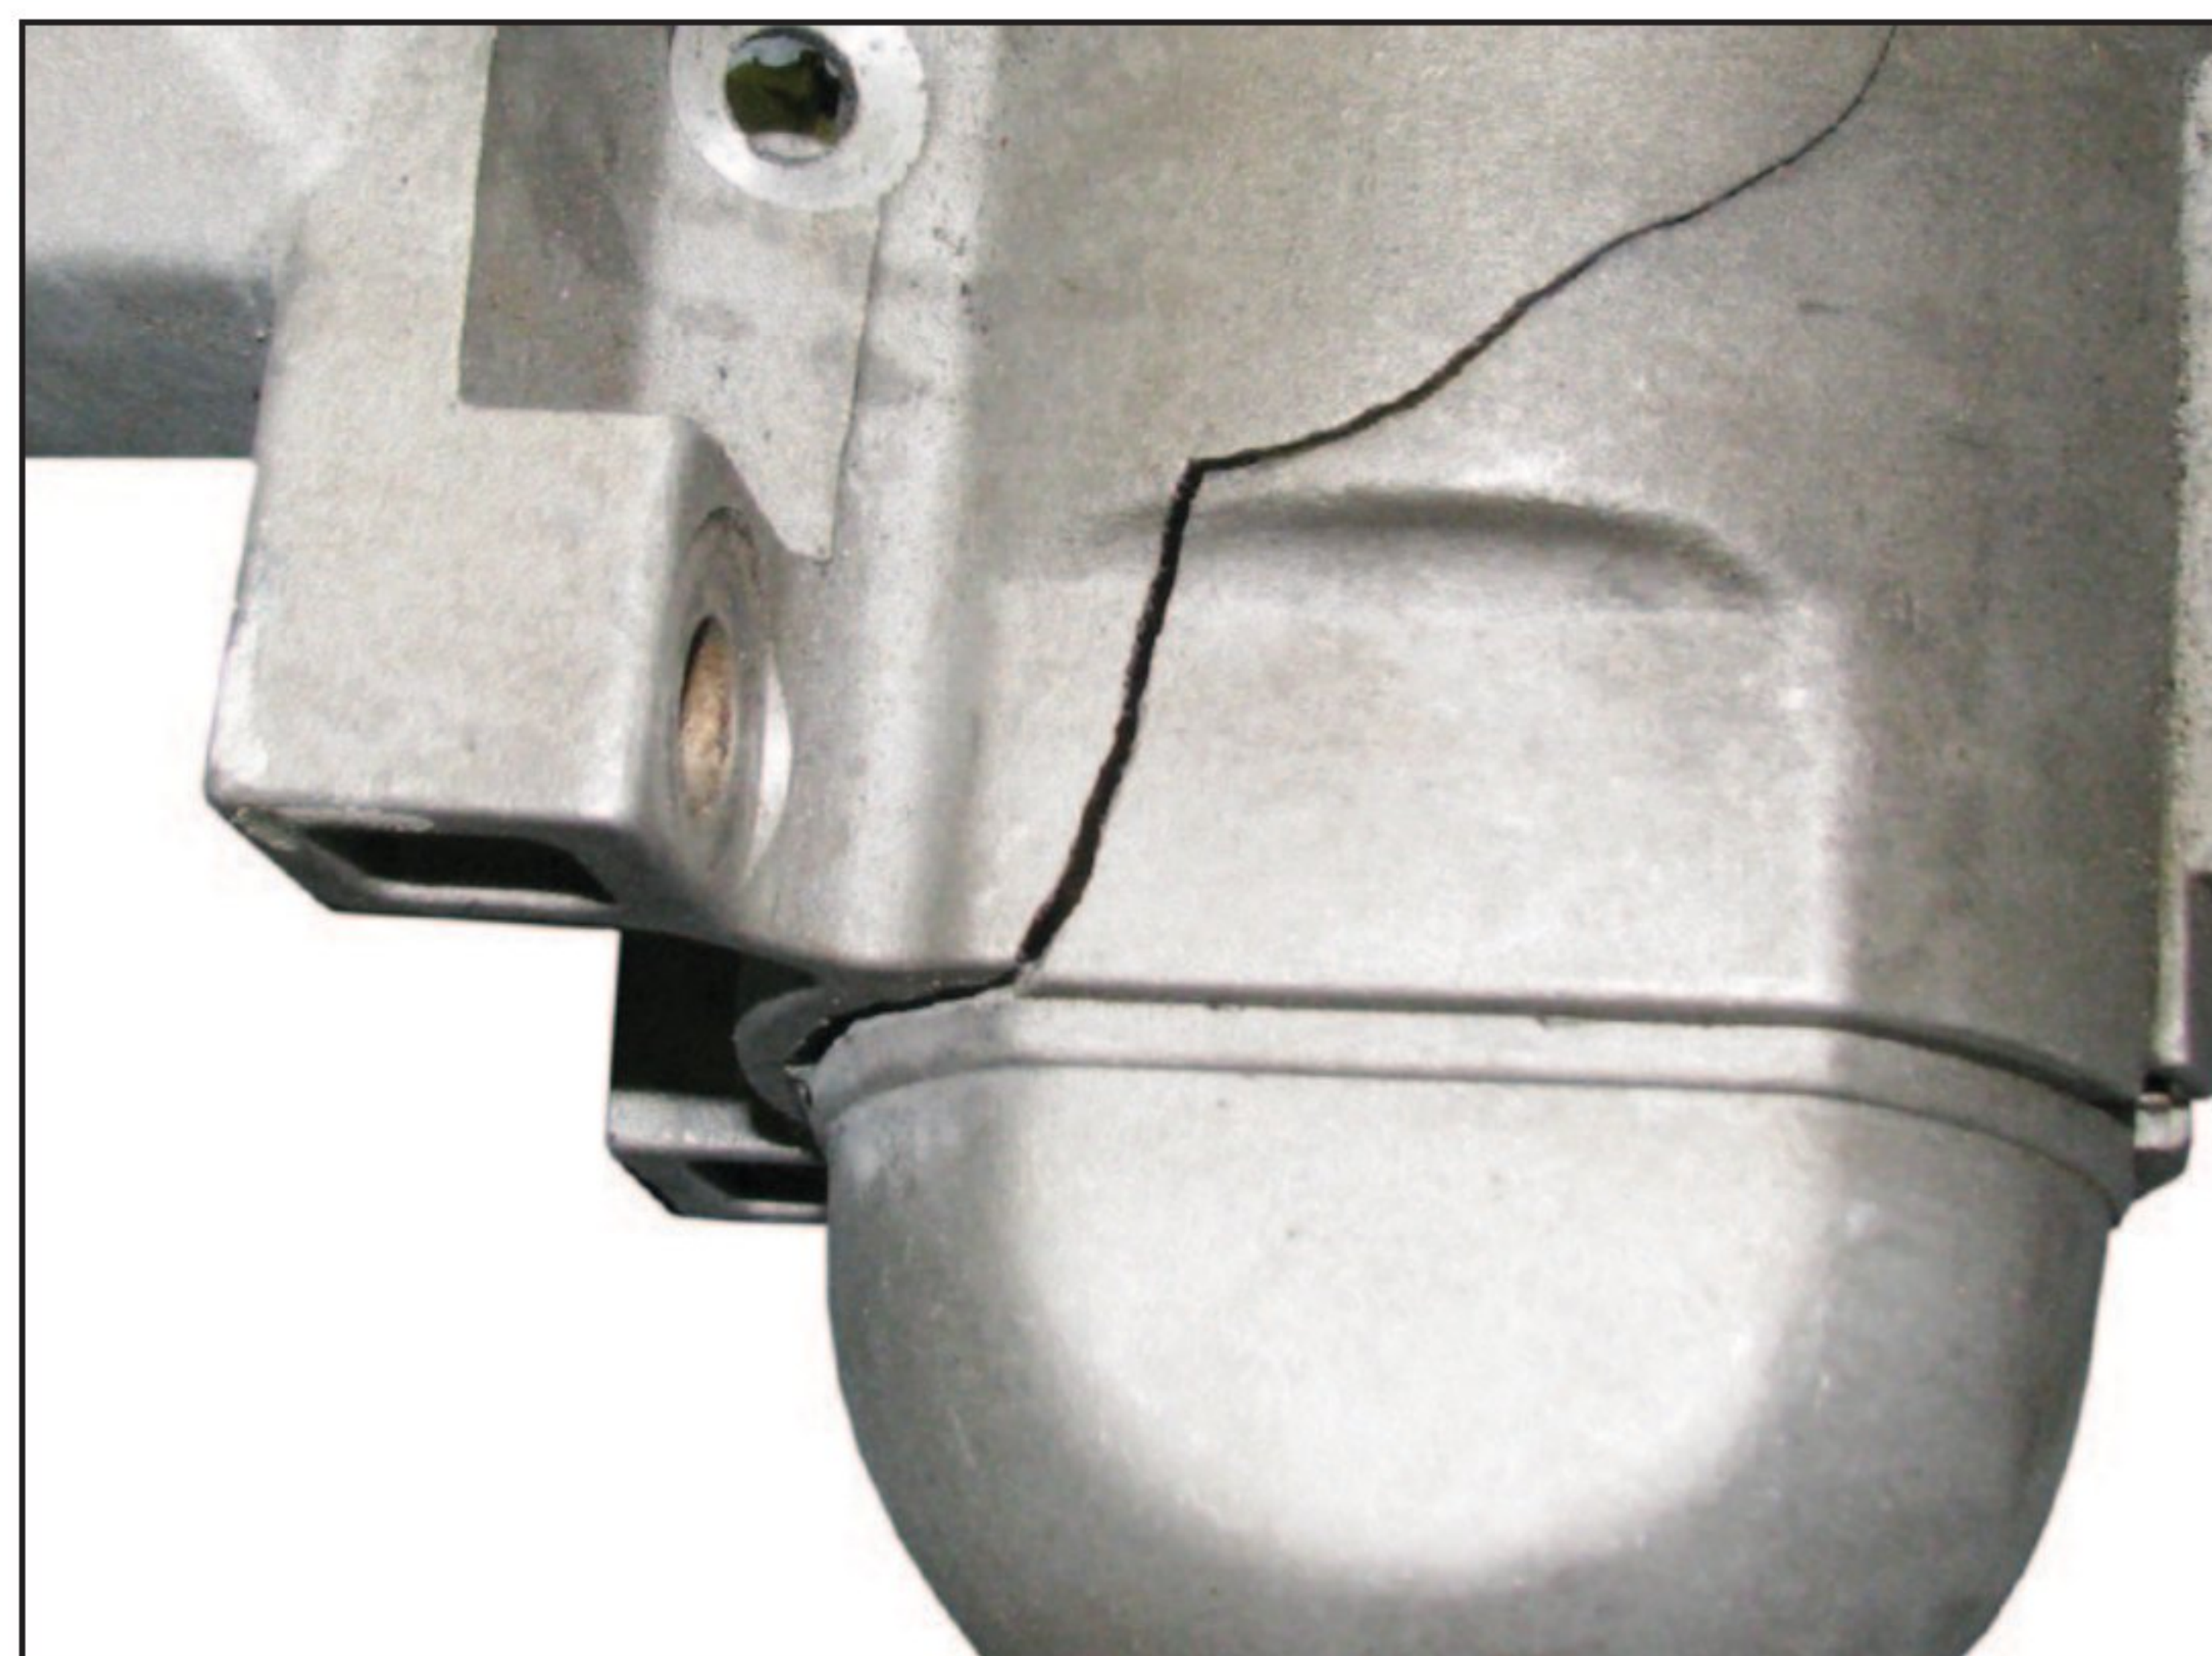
The damage to this Delco-Remy pad-mount drive-end housing was caused by improper drive-pinion-to-ring-gear clearance. Clearance is adjusted by inserting shims between the drive-end housing and the engine block.
